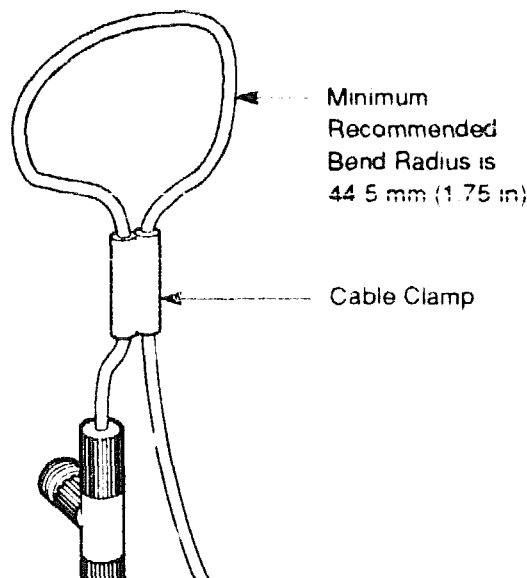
Making a ThinWire Ethernet Connection at the CPU Cover Panel
